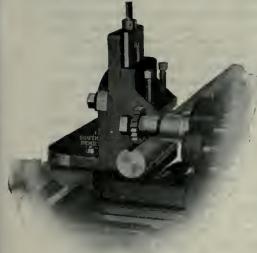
View from back of lathe showing a 3% ins. keyway heing milled in a 2-inch shaft. When shafts are taper
